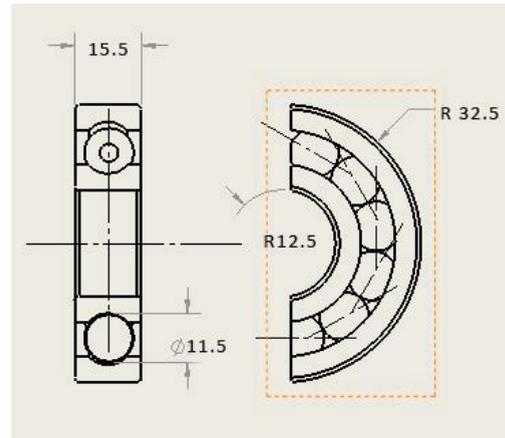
2D drawing of the assembly (Dimensions in mm)
